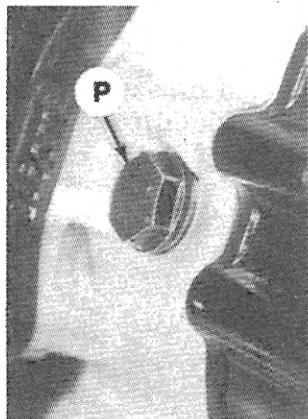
Piston is at Top Dead Center when "T" mark (TDC) on flywheel is aligned with stationary mark (M). Remove inspection plug (P) in left crankcase half to view timing mark. Piston must also be on compression stroke as outlined in test for valve clearance adjustment.
